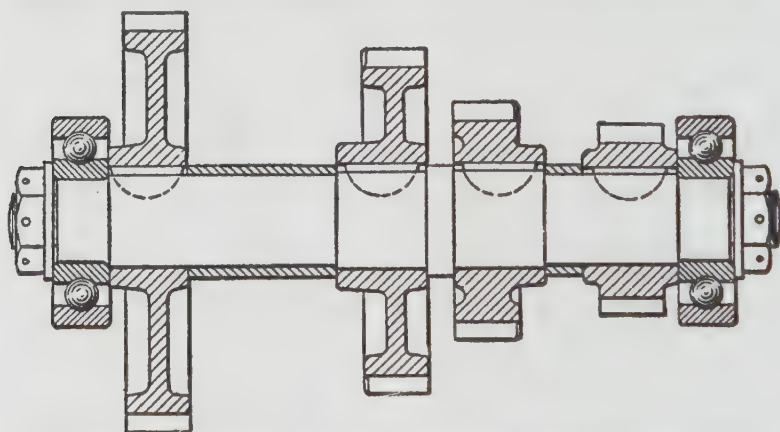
SECONDARY SHAFT ASSEMBLED WITH GEARS AND BEARINGS.
